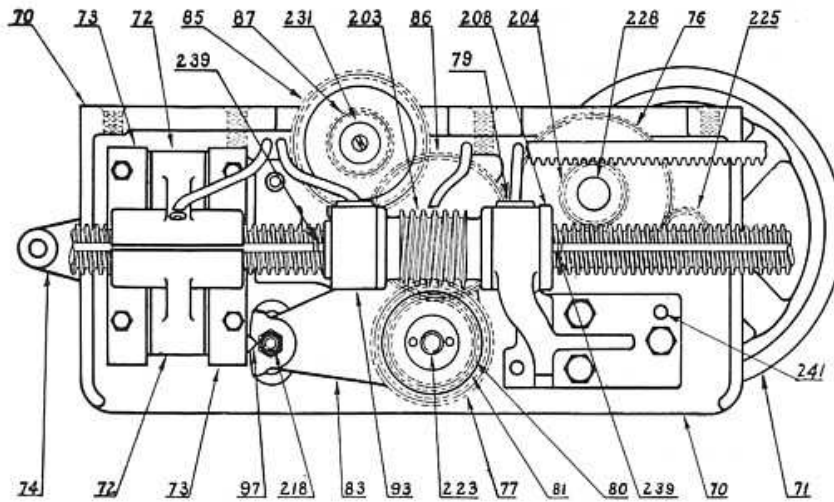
Apron for Quick, and Standard Change Gear Lathes.
